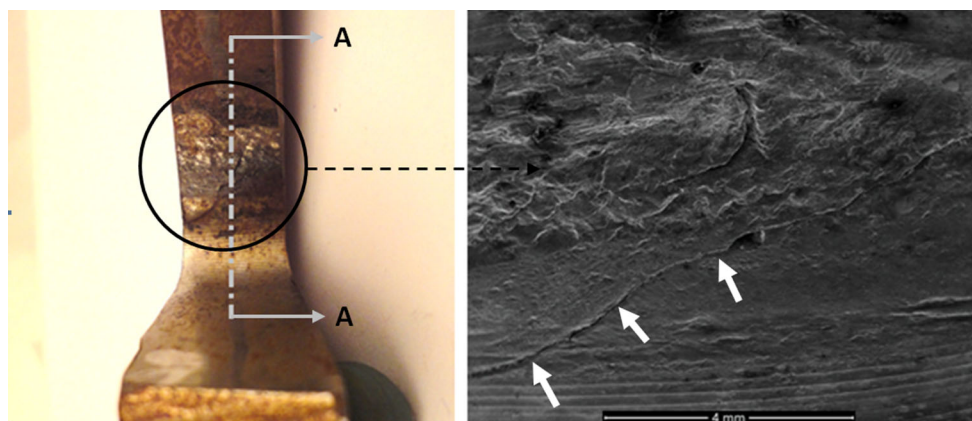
View of the surface affected by fretting via SEM. On the right image, the machining and deformation marks can be observed. On the left image, the cross section performed for the transversal view of damage by fretting is indicated
